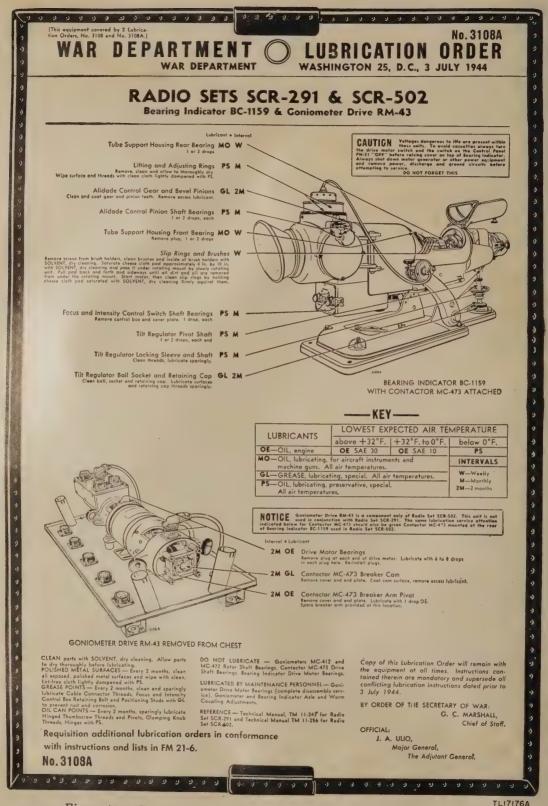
Bearing Indicator BC-1159-A and Goniometer Drive RM-43, War Department Lubrication Order No. 3108A.
